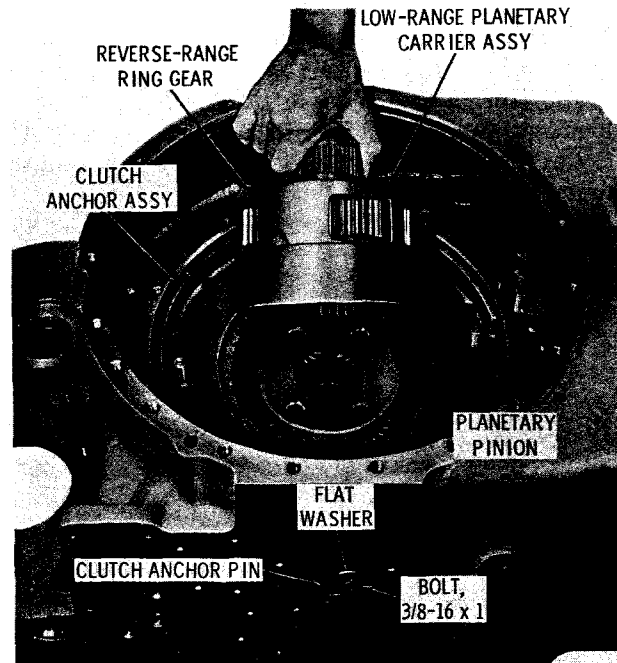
Installing low-range planetary carrier assembly and reverse-range ring gear
